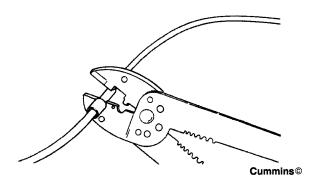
Crimp Terminal Repair Wire on Bare Wire
